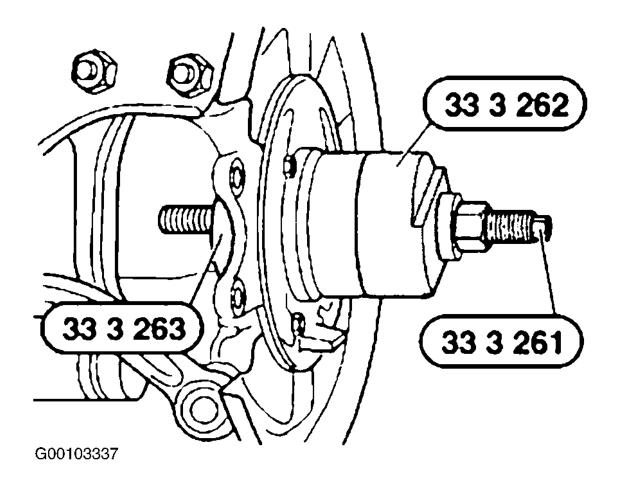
Pulling Out Wheel Bearing Courtesy of BMW OF NORTH AMERICA, INC.
